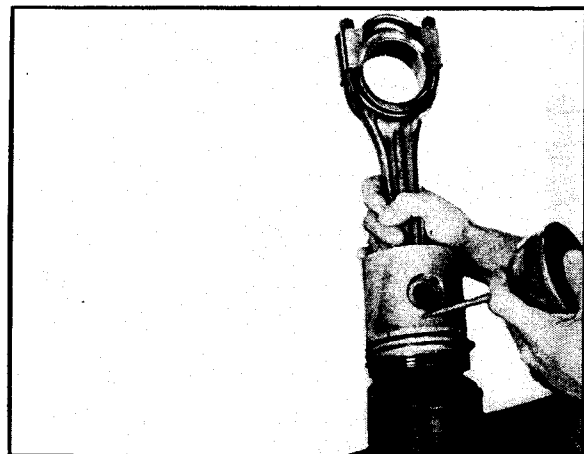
Applying lubricating oil to piston and liner assemblies
